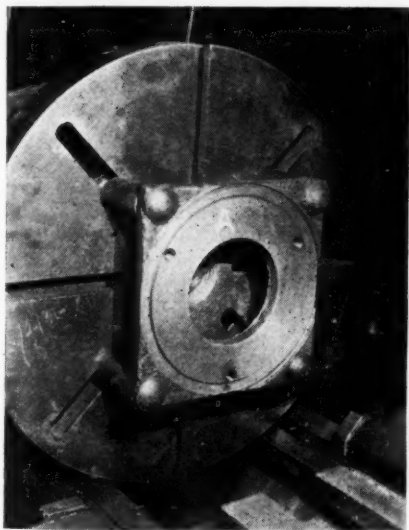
Holder after facing, machining of shoulder and removal of plug bolts
